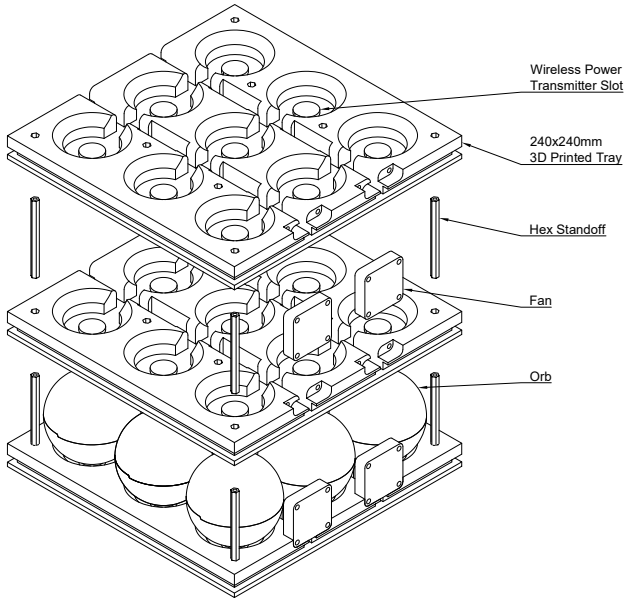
Exploded view of the wireless charging station showing the coil array, 3D-printed trays, fans and orb parking positions.
